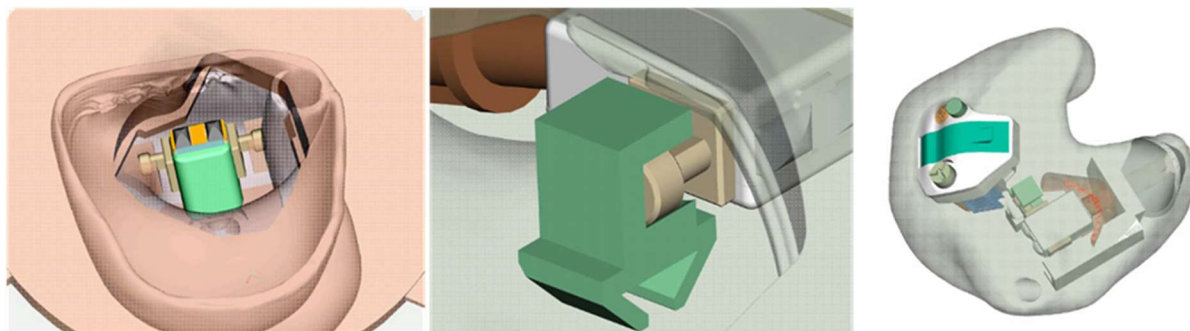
(a) and (b) shows a hearing instrument assembled and an electronic mounted faceplate from which the complete assemble is achieved. Figure 6(c) shows a hearing mold made from acrylic that is used in situations of pediatric hearing fit or for profound hearing losses that require a behind-the-ear instrumentation.
